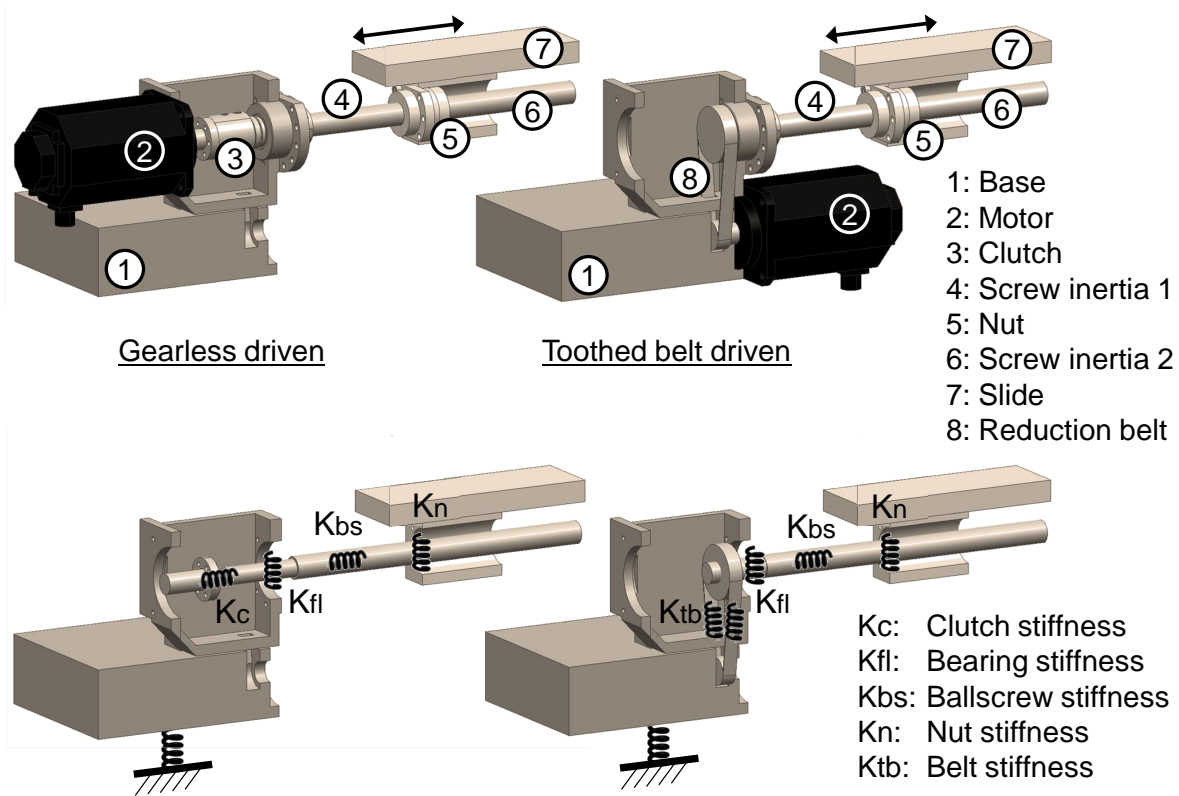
Gearless driven* and *toothed belt driven* feed drive units as main subsystems of a machine tool model.
